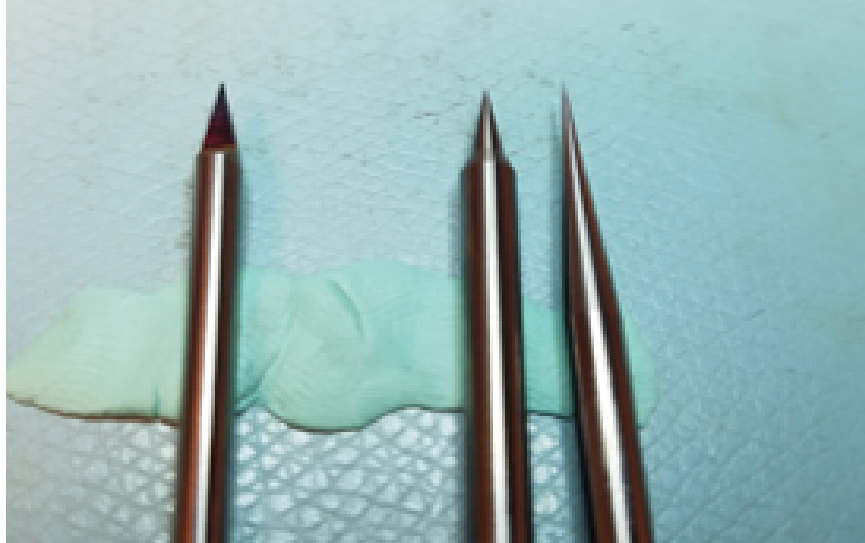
Endmills used for the manufacture of the feedhorn-transformer module. The left-most tool is a custom-ground tapered bit ending in a flat step, used for machining the Pickett-Potter feedhorn. The right-most tool is a standard  $40\ \mu\text{m}$  diameter endmill that was ground to recess the neck of the tool to fit within the horn aperture. For comparison, the middle endmill shows a standard tool with no specialized necking.
